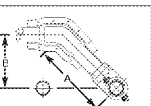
Cross-over assembly made with clamshell fittings of next size up to span over section gap.
